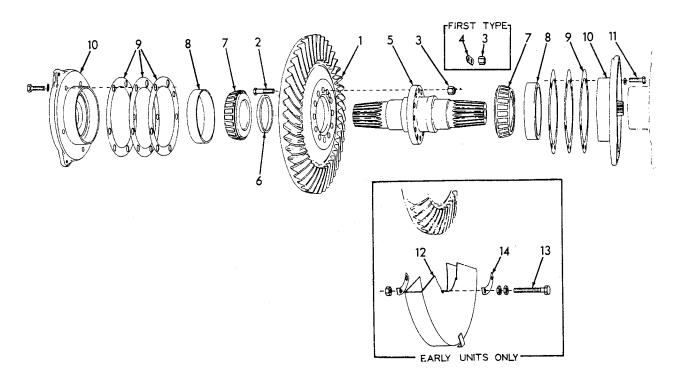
Bevel Gear and Shaft Parts (T-38140)
